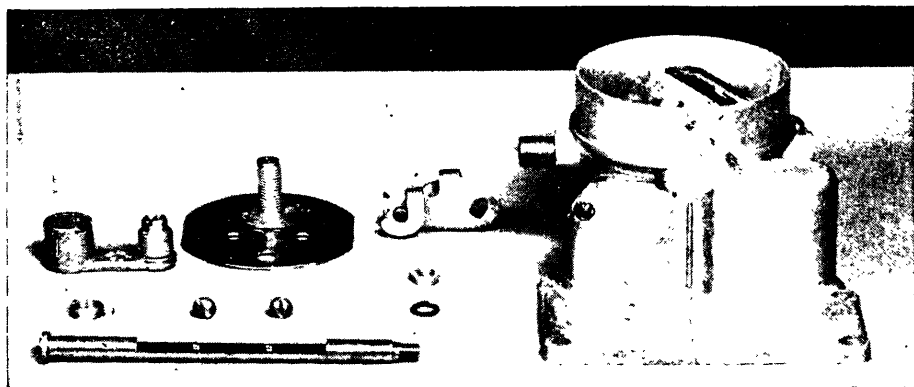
Remove choke valves and related parts. Remove choke stem together with lever and spring
